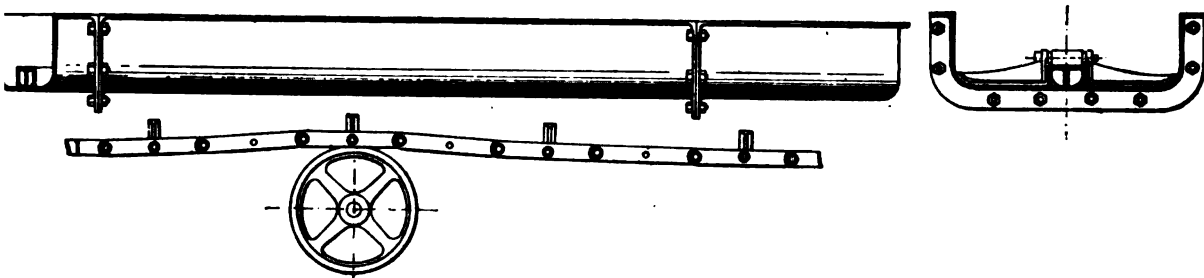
Push-plate Conveyor with Cast-iron Trough.
